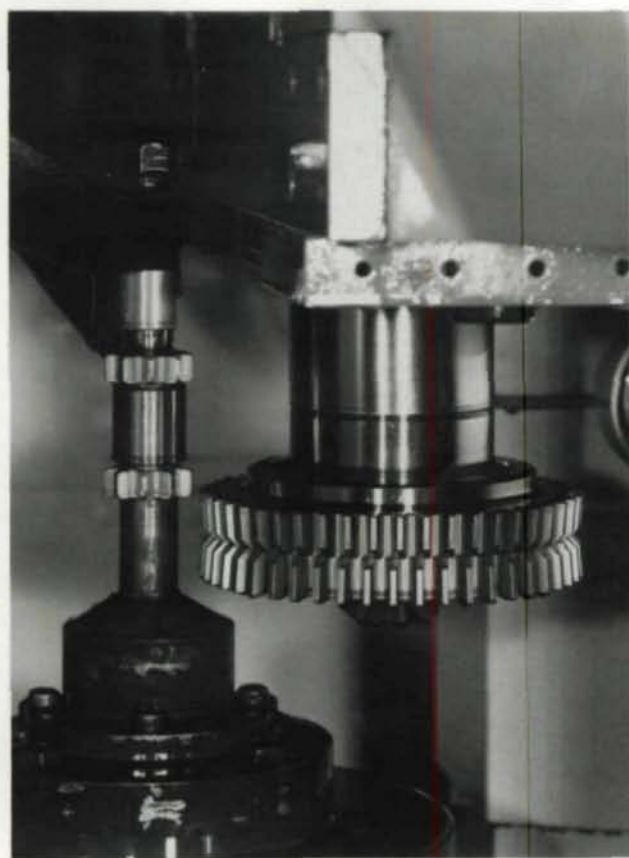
Helical cluster gear cutting with a tooth location requirement.
